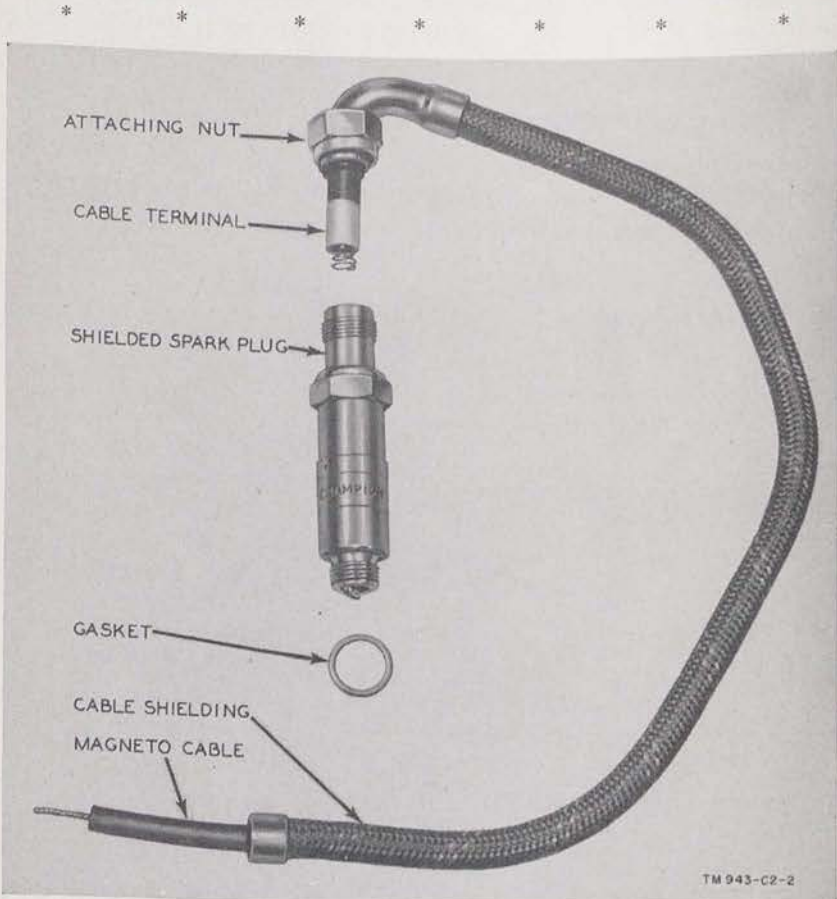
(Added). Engine GE-12-G, spark plug and shielding assembly.
